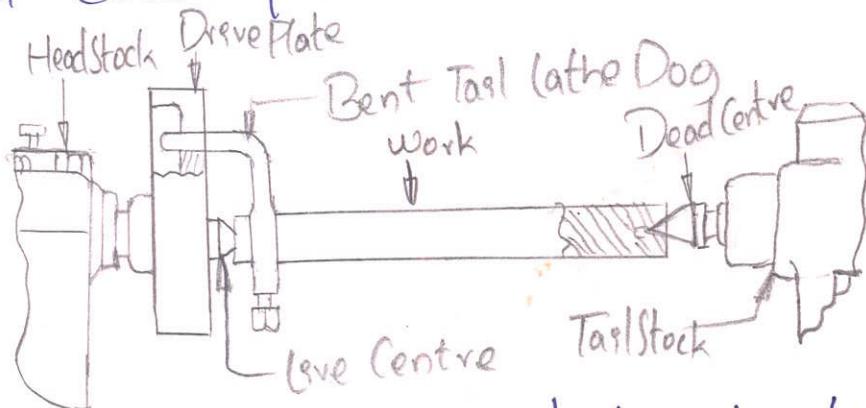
Drive plate and bent-tail lathe dog used to drive work mounted between the lathe centres
